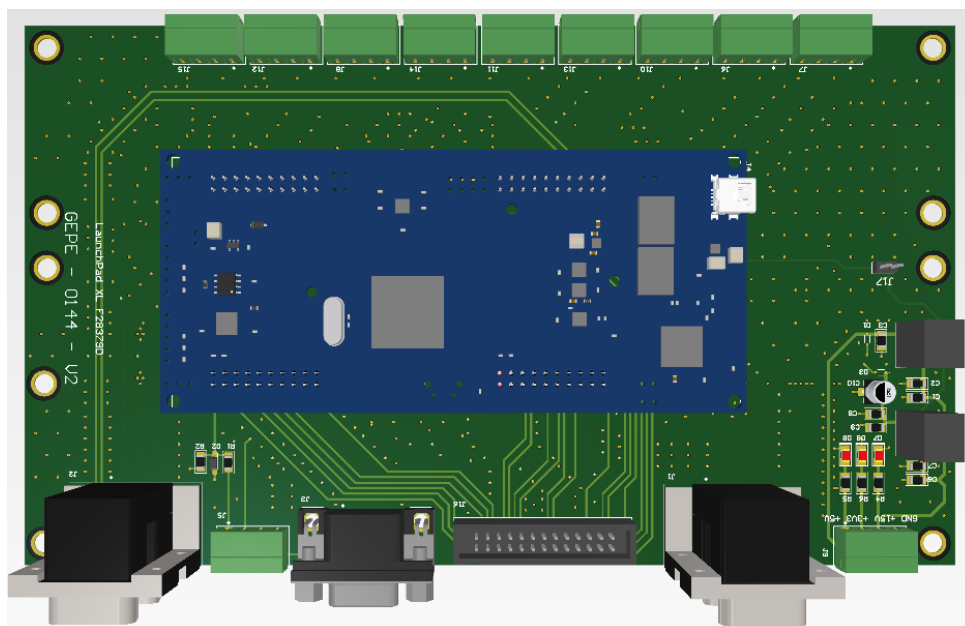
3D view of the DSP TMS320F28379D dock station PCB.
